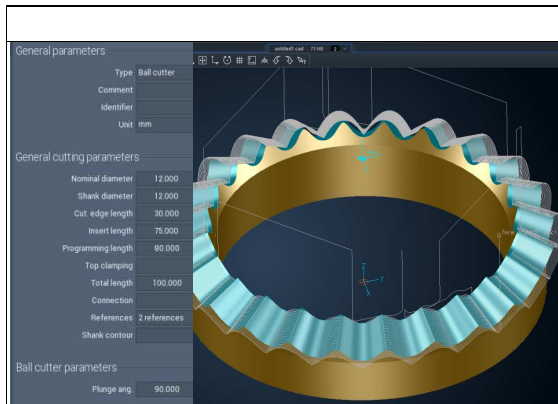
“Equidistant milling” strategy and the ball mill cutting tools definition.
